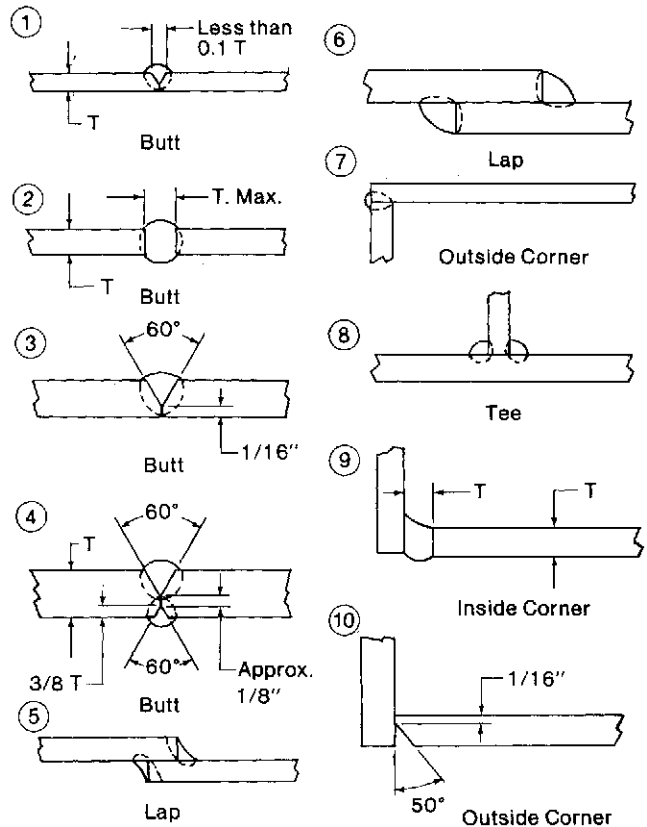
shows typical joint preparation for GTAW welding, and Table 10 shows general requirements for GTAW welding of stainless steels according to the thickness of the base metal, the joint configuration, and the welding position. As in all welding of stainless steels, cleanliness of the joint area is imperative for optimum results. Table 11 shows some typical conditions for automatic hot-wire GTAW.
